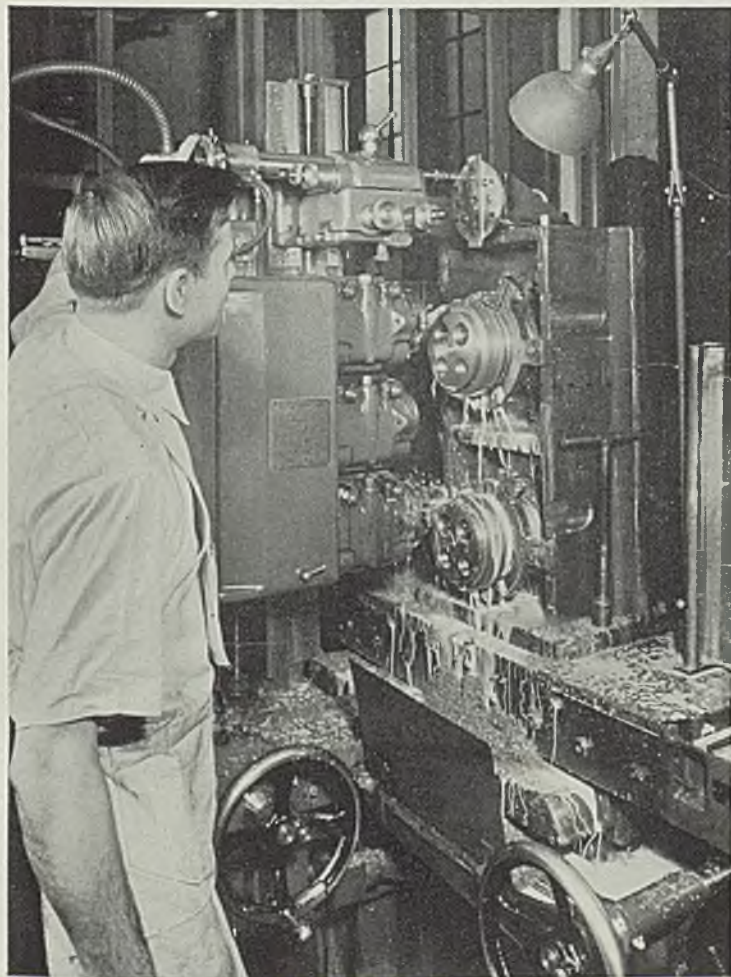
Keller profiling machine, opposite page, milling spark plug bosses on tops of two barrels simultaneously. Note templet and tracer at top of work-holding fixture
